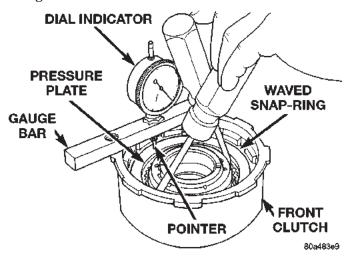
Measuring Front Clutch Pack Clearance REAR CLUTCH
